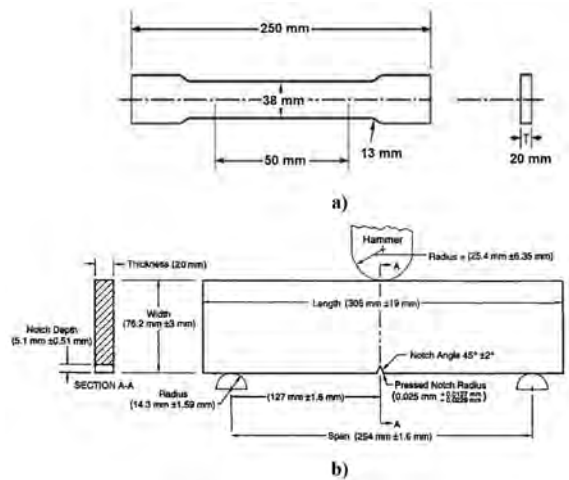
Sample dimensions for a) the tensile tests and b) the DWTT tests.
